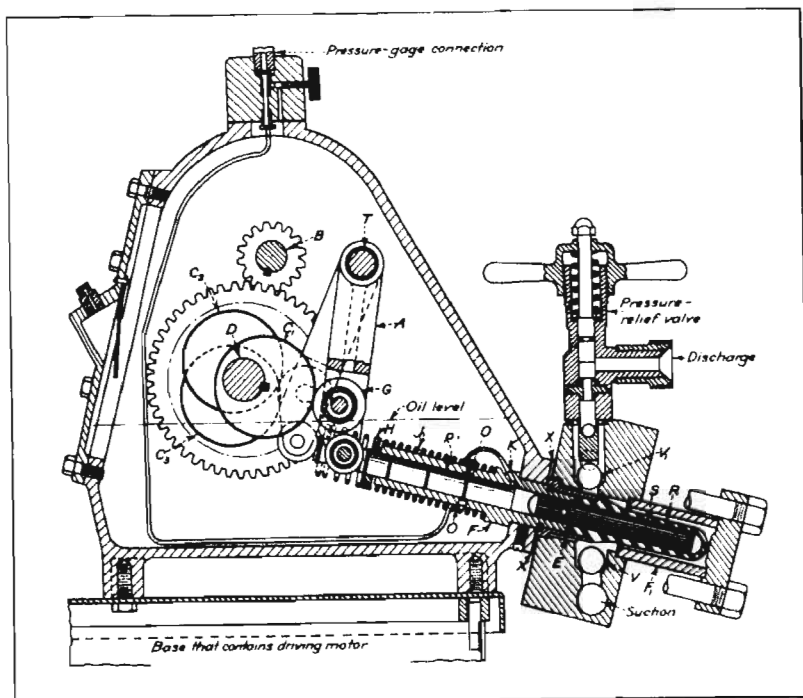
Triplex type of pumping mechanism which imparts three pulsations to a homogenizer with each revolution of a camshaft.
